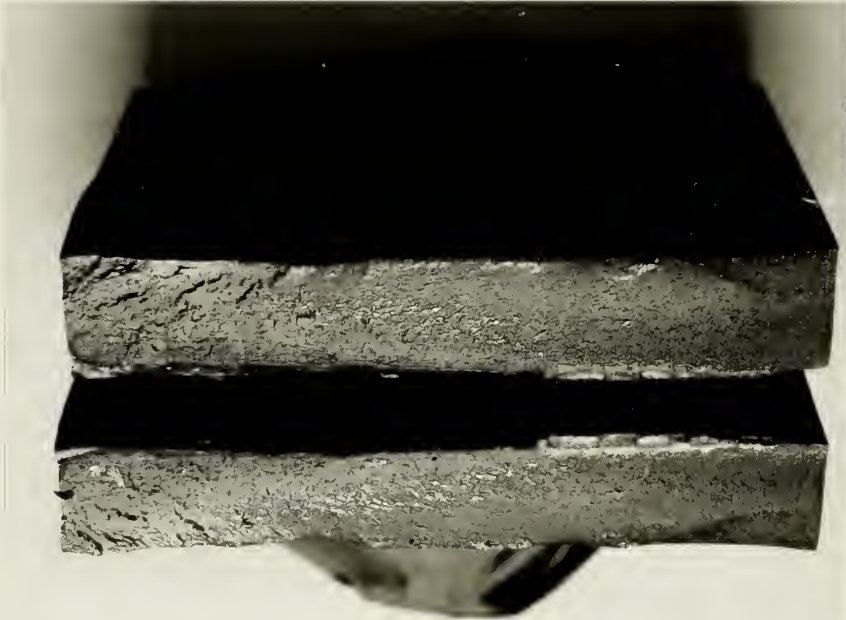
Photo of fatigue fracture of a weld metal-notched test strip.
